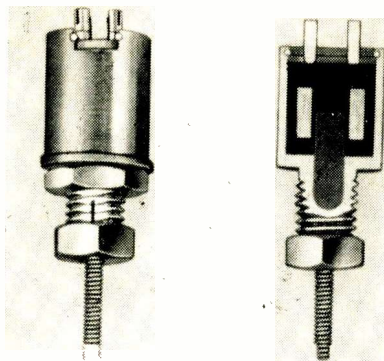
Miniature slug-tuned and shielded r-f coil form is 7/16 inch in diameter and extends 3/8 inch below chassis when mounted with screw above chassis
